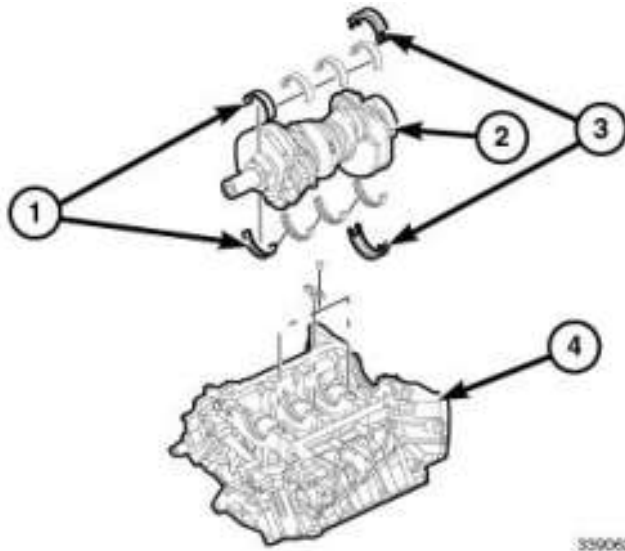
Crankshaft, Bearings, Thrust Bearing & Engine Block
